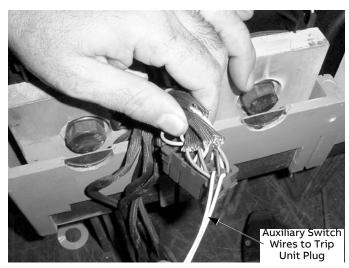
Auxiliary switch wires inserted into the trip unit plug.
